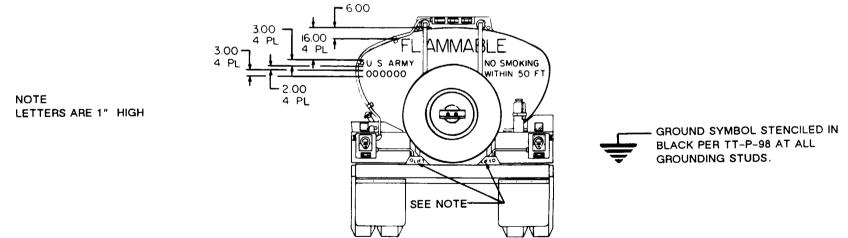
Stenciling Typical (M967 and M967A1) (Sheet 2 of 2).
